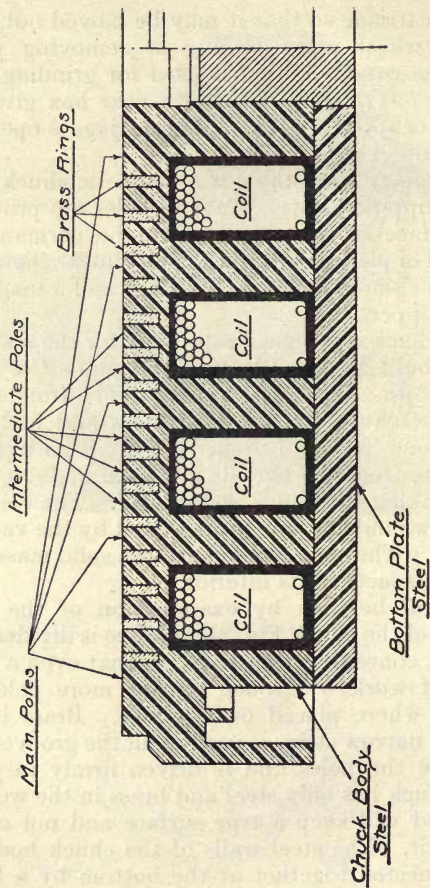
SECTION OF 26 IN. BLANCHARD ONE-PIECE STEEL MAGNETIC CHUCK
